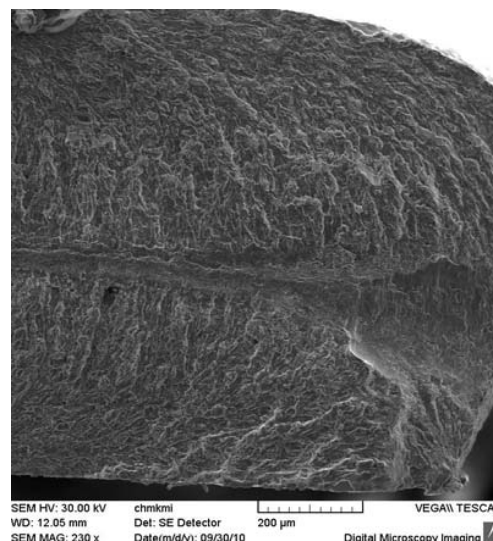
Appearance of fatigue fracture of material without nitrooxidation. Symmetrical fatigue crack propagation from both side of steel sheet
